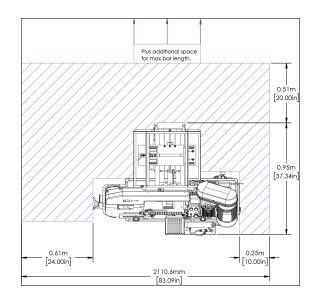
Dimensions of the machine and it's required added space, as viewed from above.
